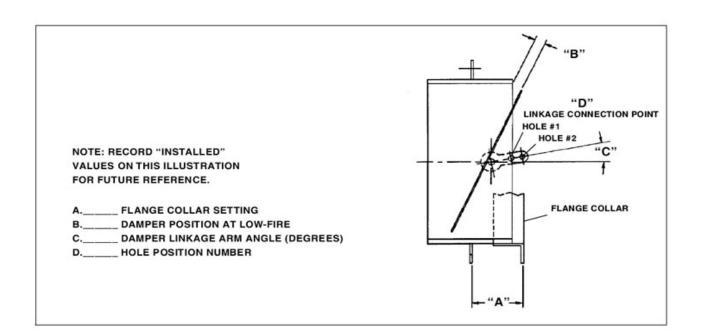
Flange Collar and Damper Settings (Top View)
